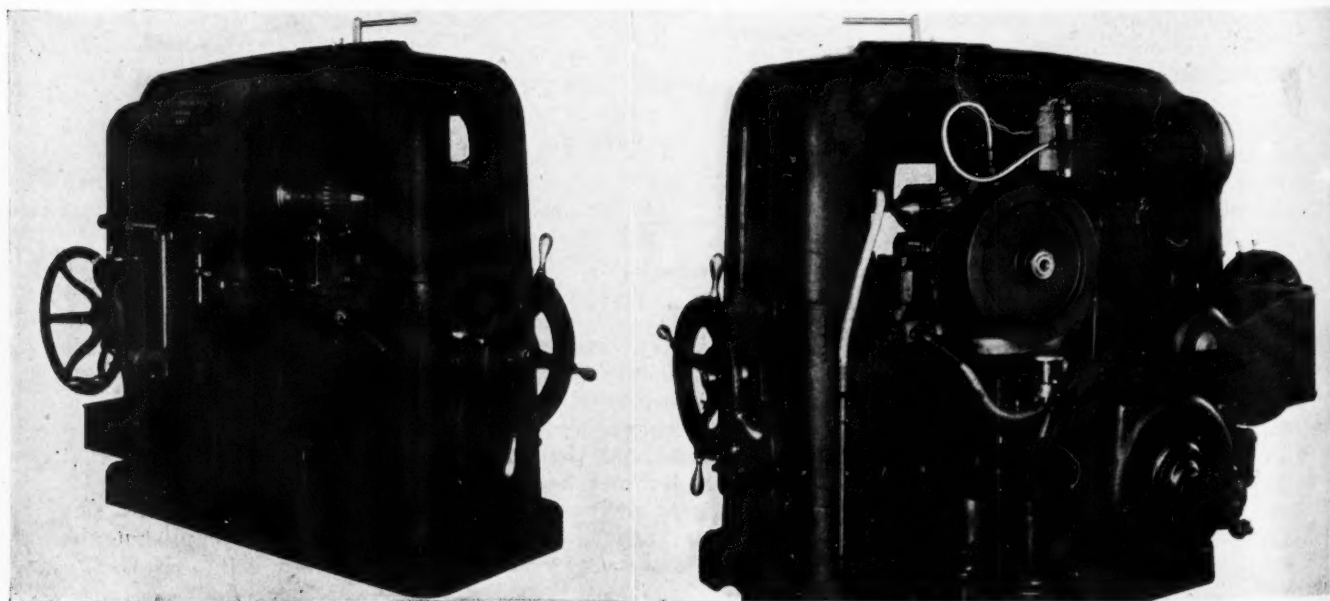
Lees-Bradner single purpose gear generator. Fig. 2—Rear view of gear generator, showing driving motor, flywheel on hob spindle and connections of lubricant and coolant circulating systems
